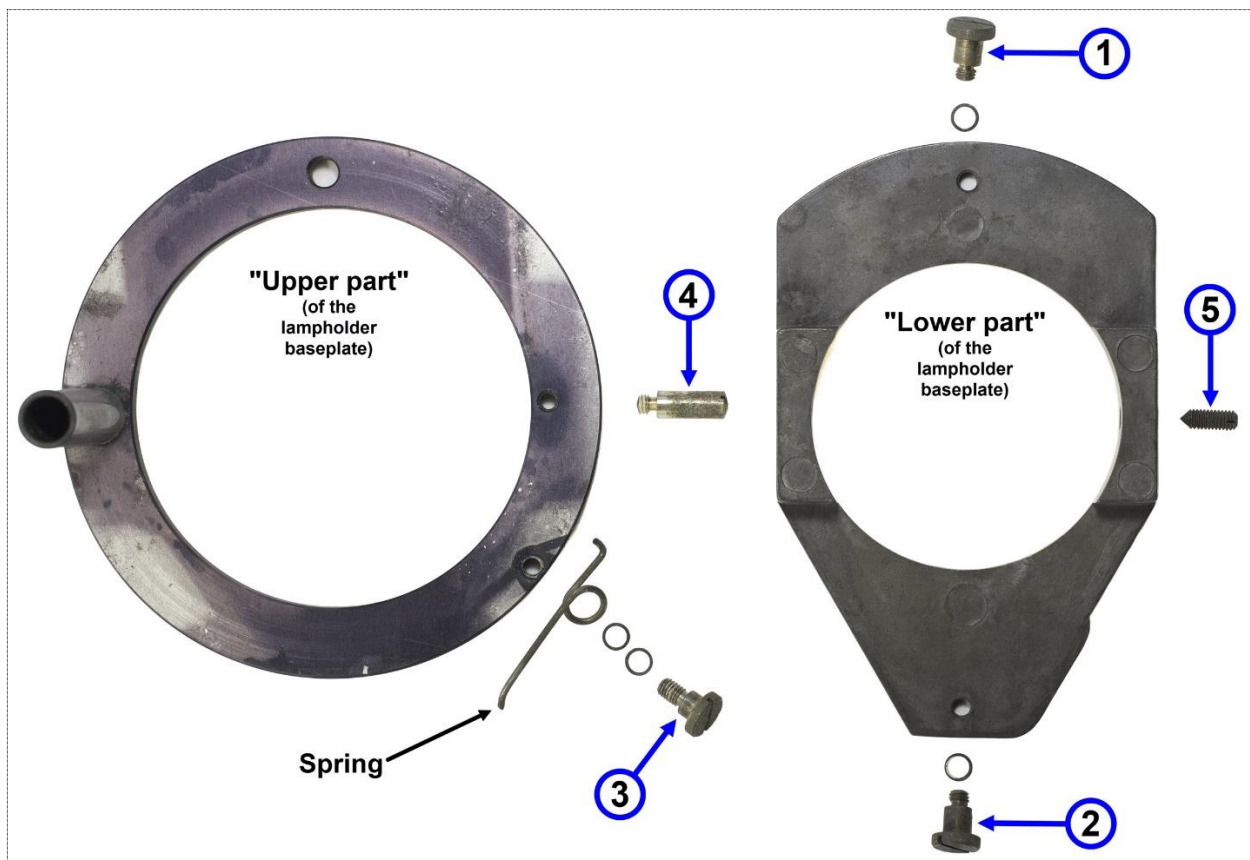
The lamp holder baseplate completely disassembled. Identification of the screws:
